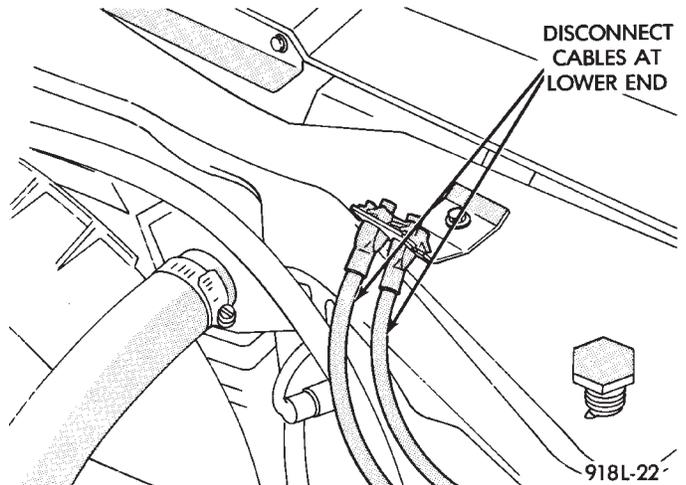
Headlamp Adjuster Cables—AC/D-Body
